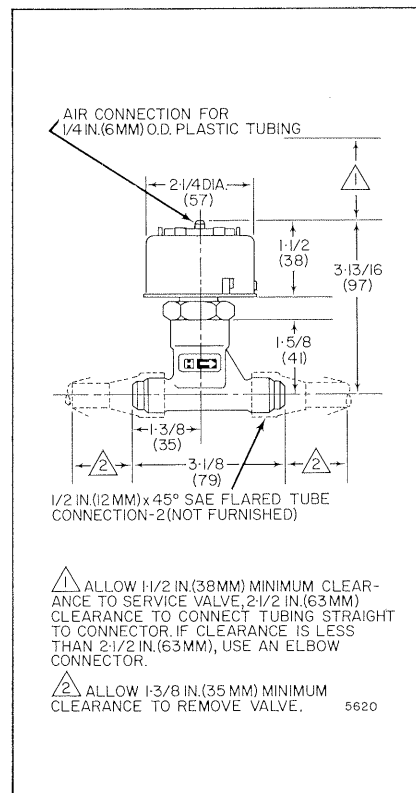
VP527A DIMENSIONS IN INCHES (MILLIMETERS)
